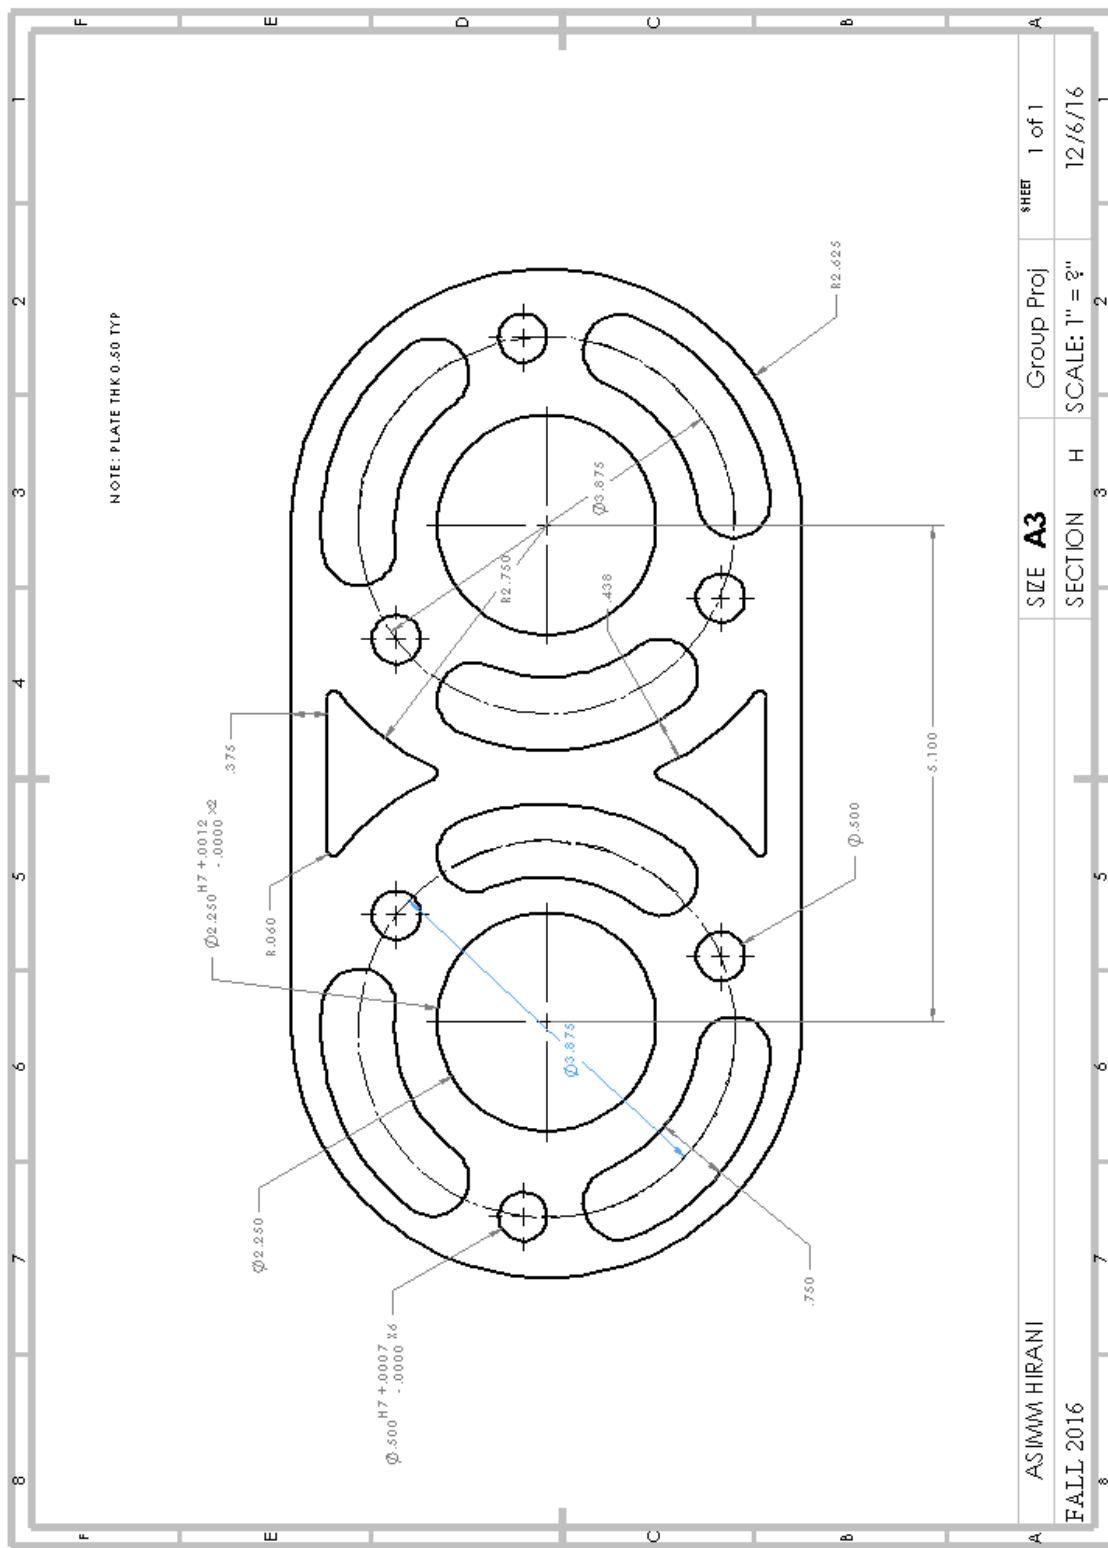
Hirani, Asimm: Gearbox Plate
